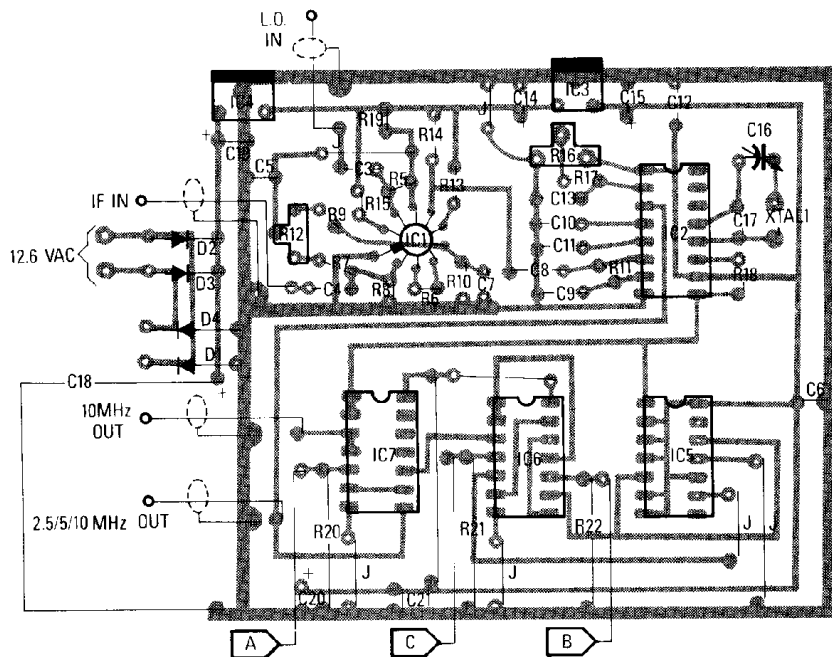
THE COMPONENTS CAN BE MOUNTED on perforated-wiring board. To help shield the components, a large braided grounding wire runs around the board.
